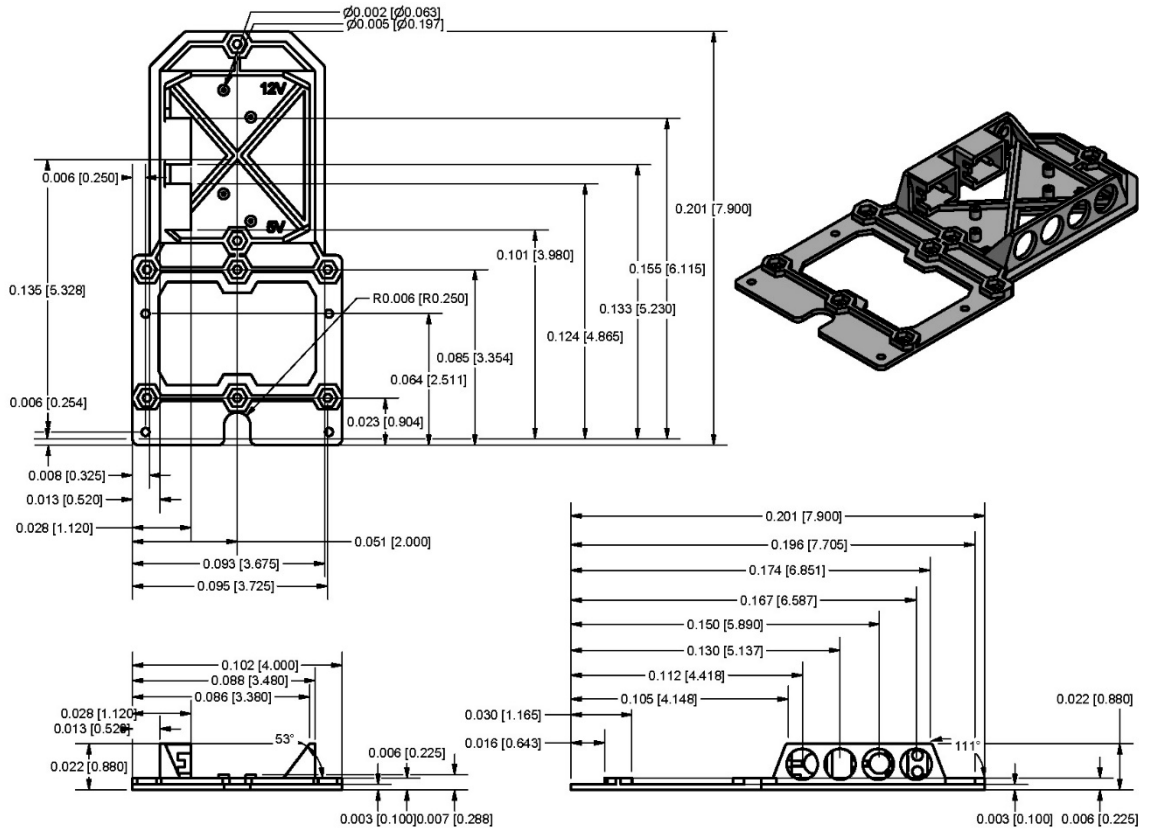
Mount for attaching all the instrumentation in LiDAR assembly.
